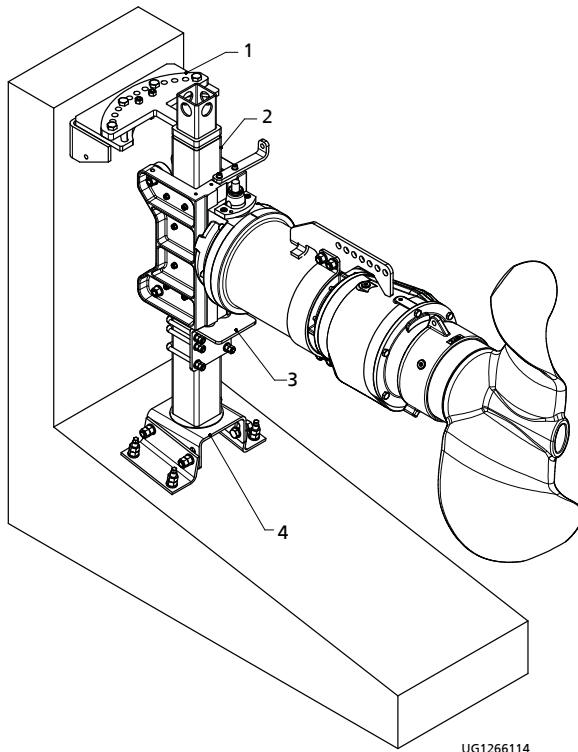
Installation example: Amaprop 1000 mounted on tank wall and horizontal tank floor
